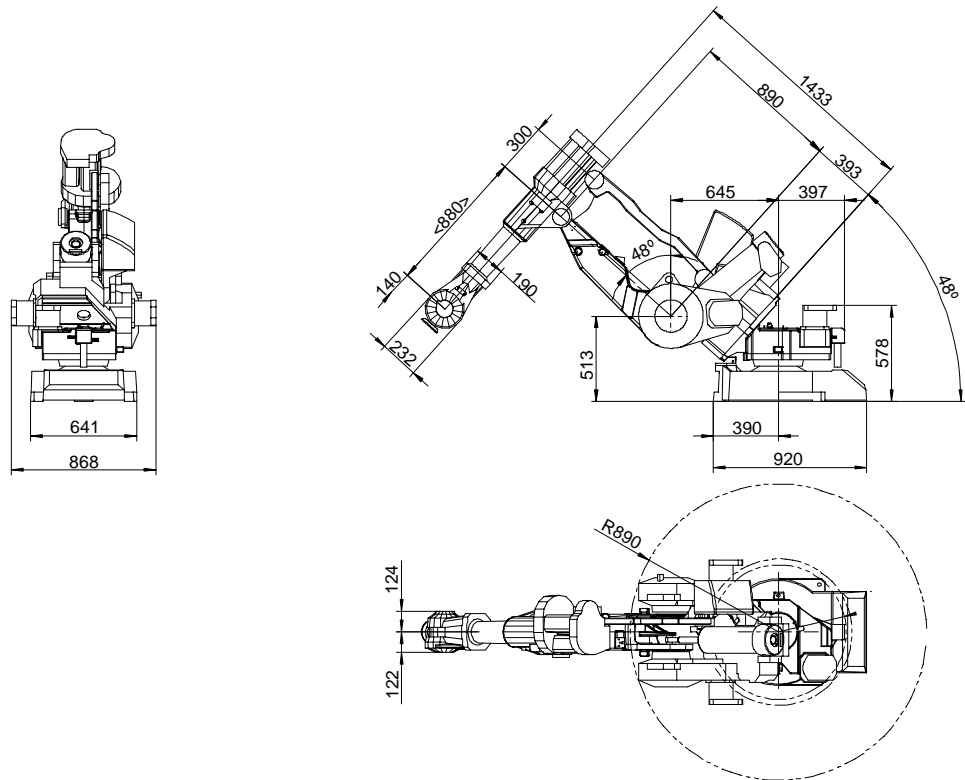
View of the manipulator from the side, behind and above (dimensions in mm).
